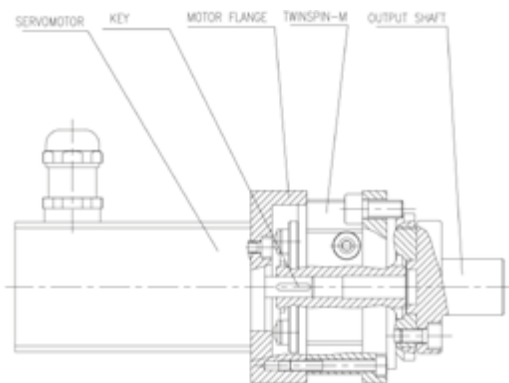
Shaft connection with a keyway / Obr.5.4.1a: Die Verknüpfung der Wellen mit dem Federnut
